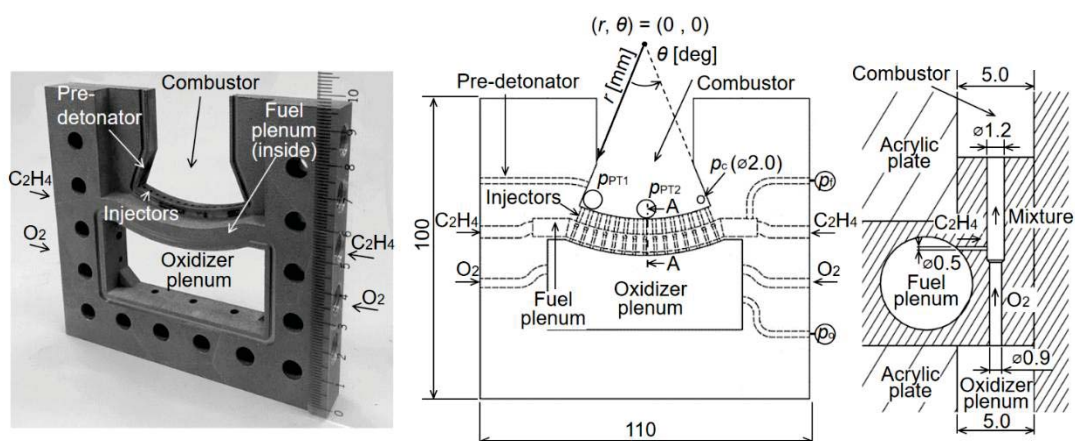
Picture of 3D-printed combustor (left) (unit: cm), geometry of combustor (center), and cross-sectional view A-A (right) (unit: mm).
